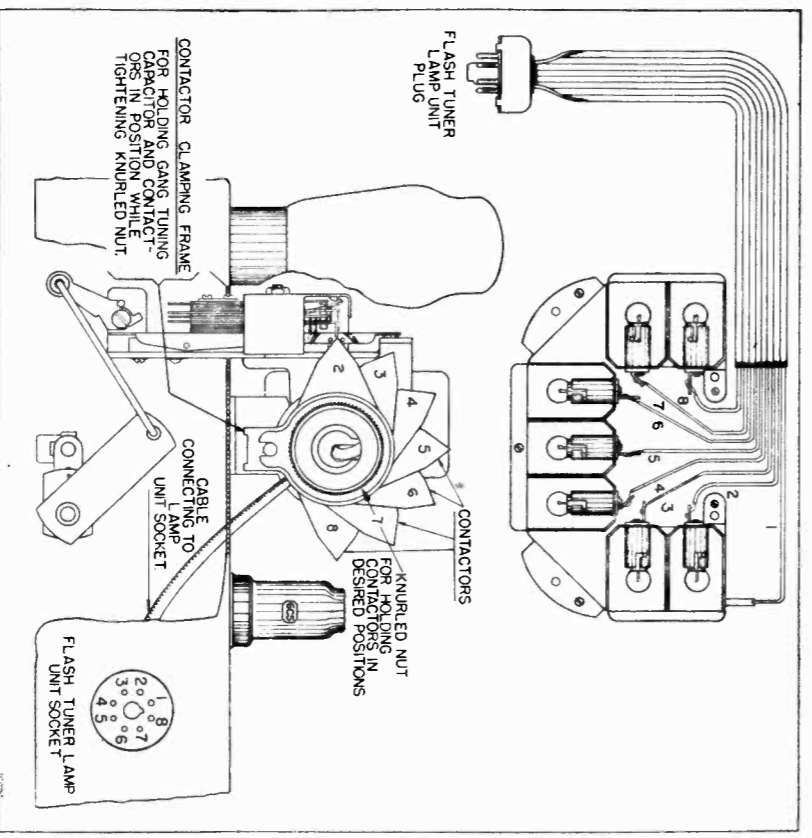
Showing Flash Tuner Lamp Unit with Escutcheon Plate Removed (Top Figure) and Rear View of Receiver Showing Flash Tuner Mechanism (Bottom Figure).
